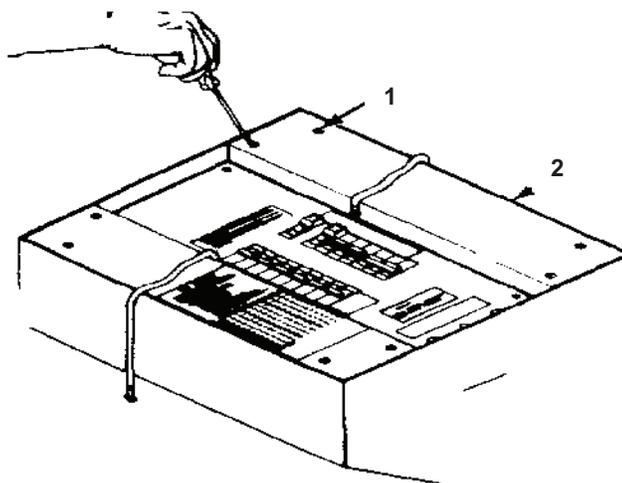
DISE Circuit Breaker Panel Board (1 of 2)
